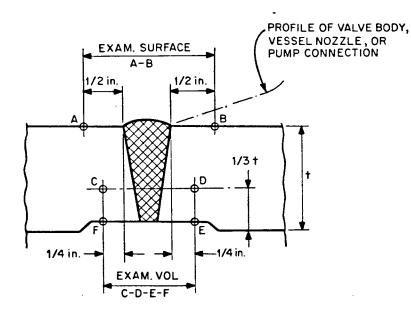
WELDS IN PIPING
